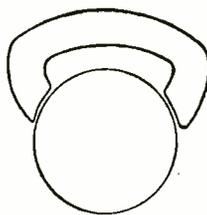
The end turns after bending should take the form shown here. This is important for the frame coils, but less so for the line.
